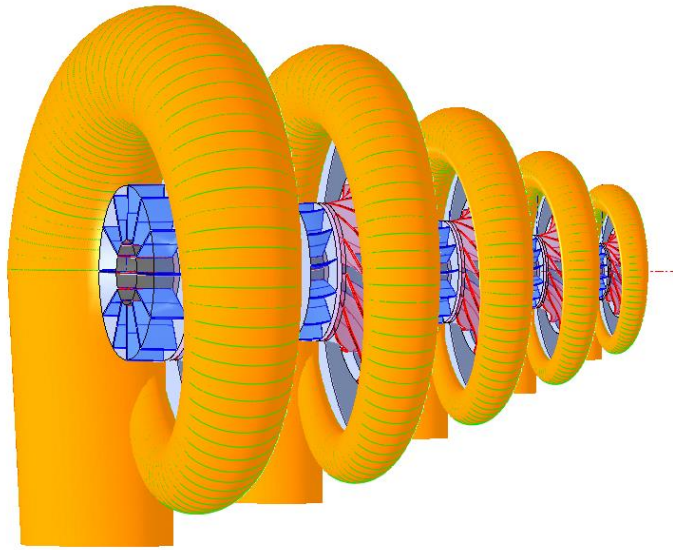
MULTISTAGE INTEGRALLY GEARED CENTRIFUGAL COMPRESSOR, DESIGN 3
